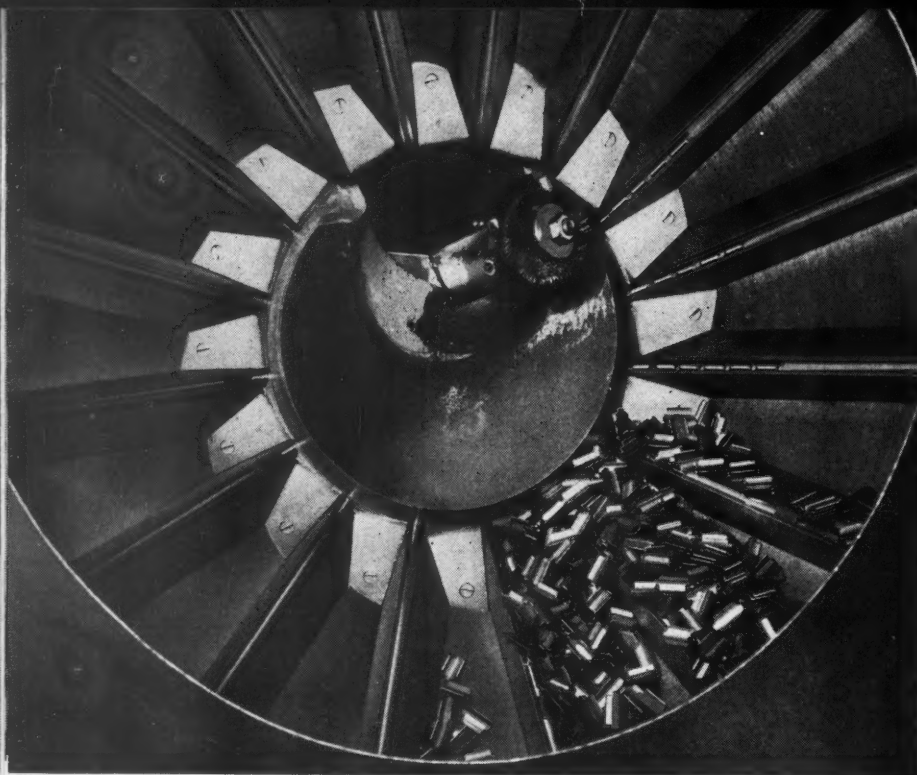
Close-up view of the vane-feeding hopper used on automatic loading and staking machine seen in Fig. 12. The vanes are agitated by rotating hopper until they become aligned
